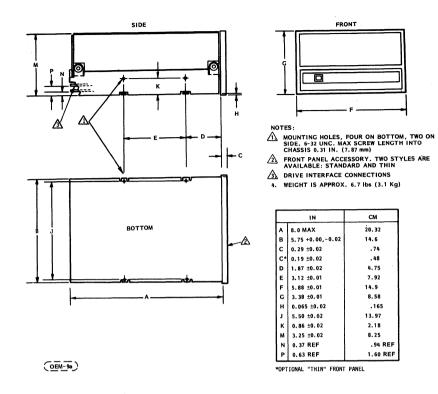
OUTLINE AND MOUNTING DIMENSIONS
